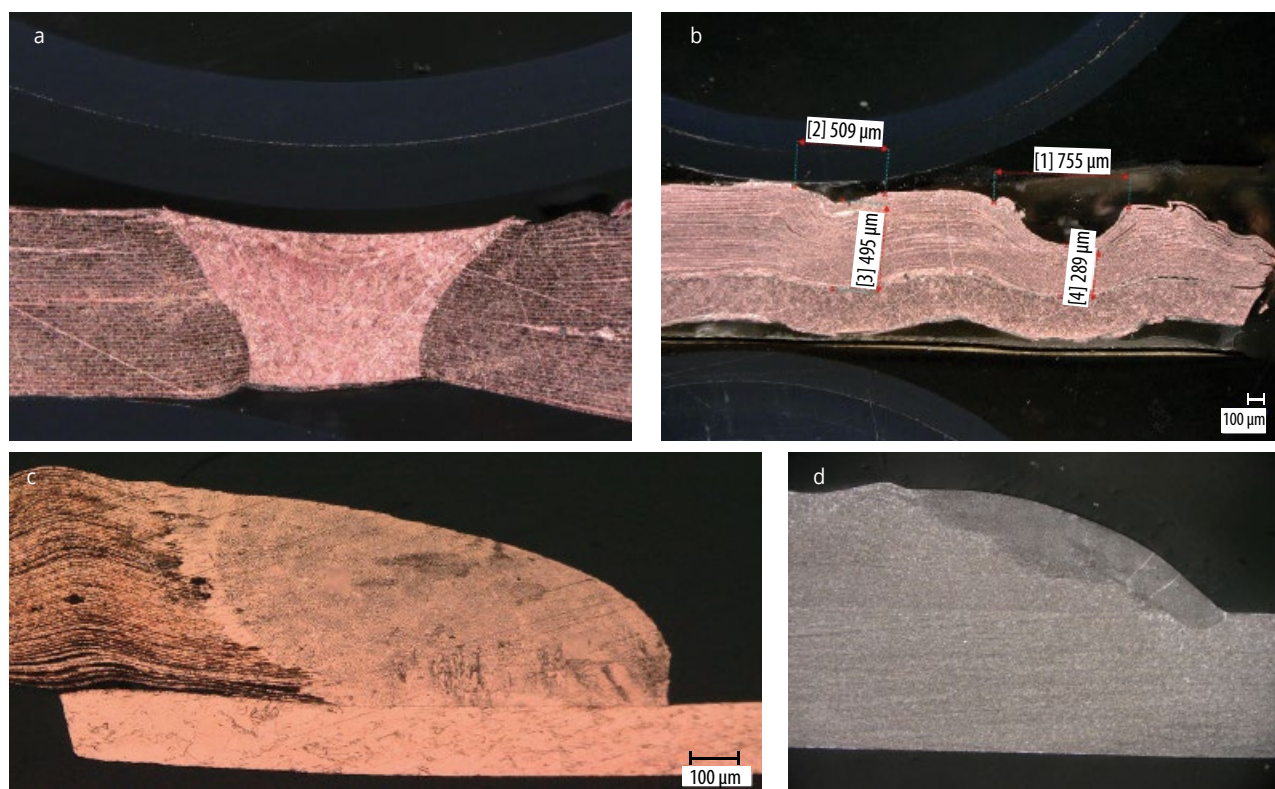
The blue laser joins forty two 8- μm foils with no defects (a). In contrast an ultrasonic weld of a similar geometry (b). In a single operation, the blue laser welded seventy 8- μm copper foils to a 400- μm copper tab (c), and joined these forty 18- μm aluminum foils to a 600- μm tab.
